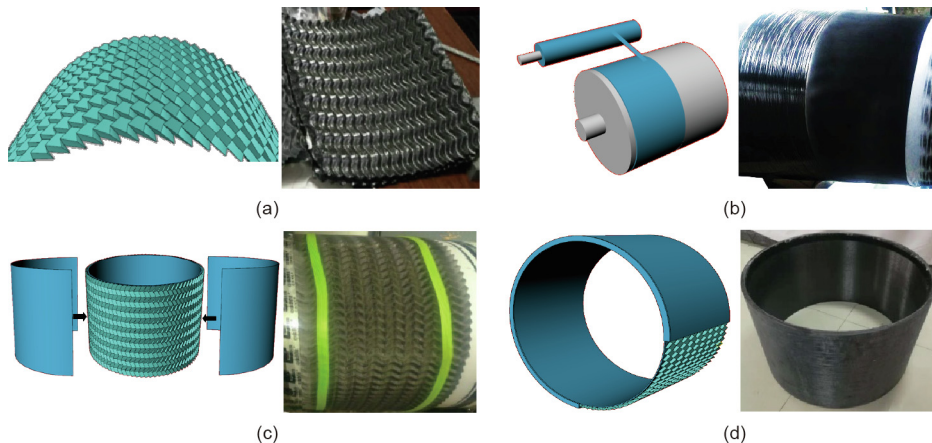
Manufacturing process of the CFRC AFSC. (a) The fold-core made by the hot-pressing method; (b) the inner skin is made by filament winding and lay-up placing; (c) adhering the fold-core and skins; (d) the completed cylinder after finishing the outer skin.
